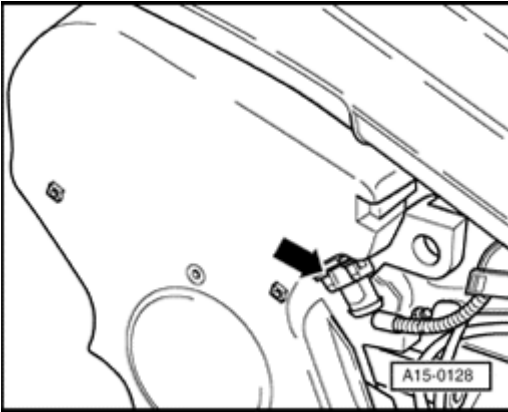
Locating Connector At Camshaft Position Sensor G40
